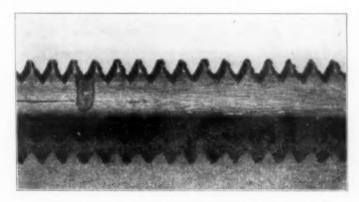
Burrs thrown up on Cutting Edges of Tap, Causing Chattering of Nut
